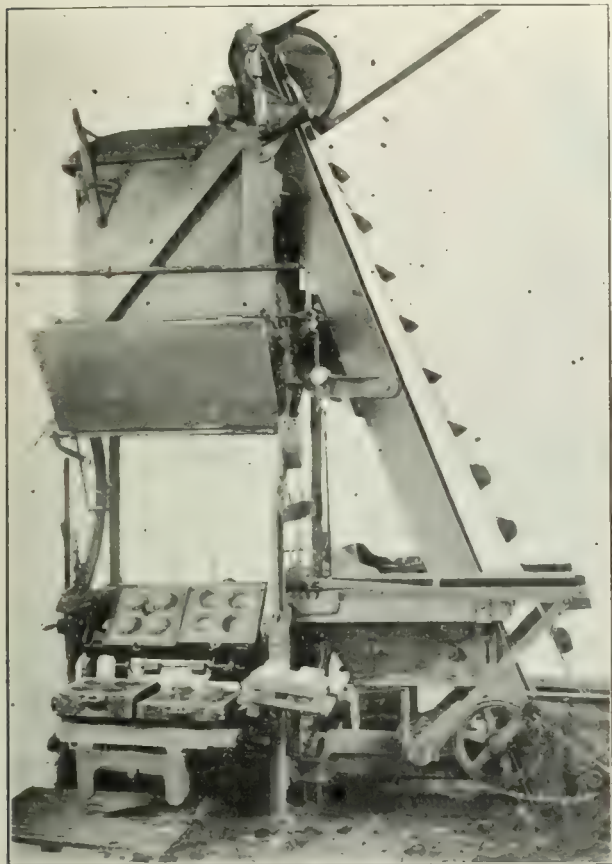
The Automatic Power Molding Machine Built by the Arcade Mfg. Company, Freeport, Ill.
